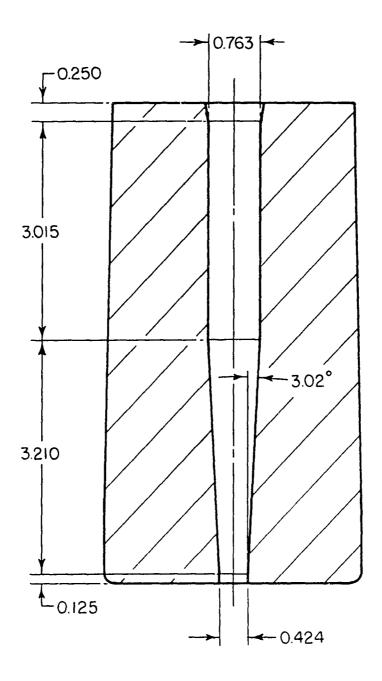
DIMENSIONS OF DIE USED FOR EXTRUSION FORGING TRIALS
